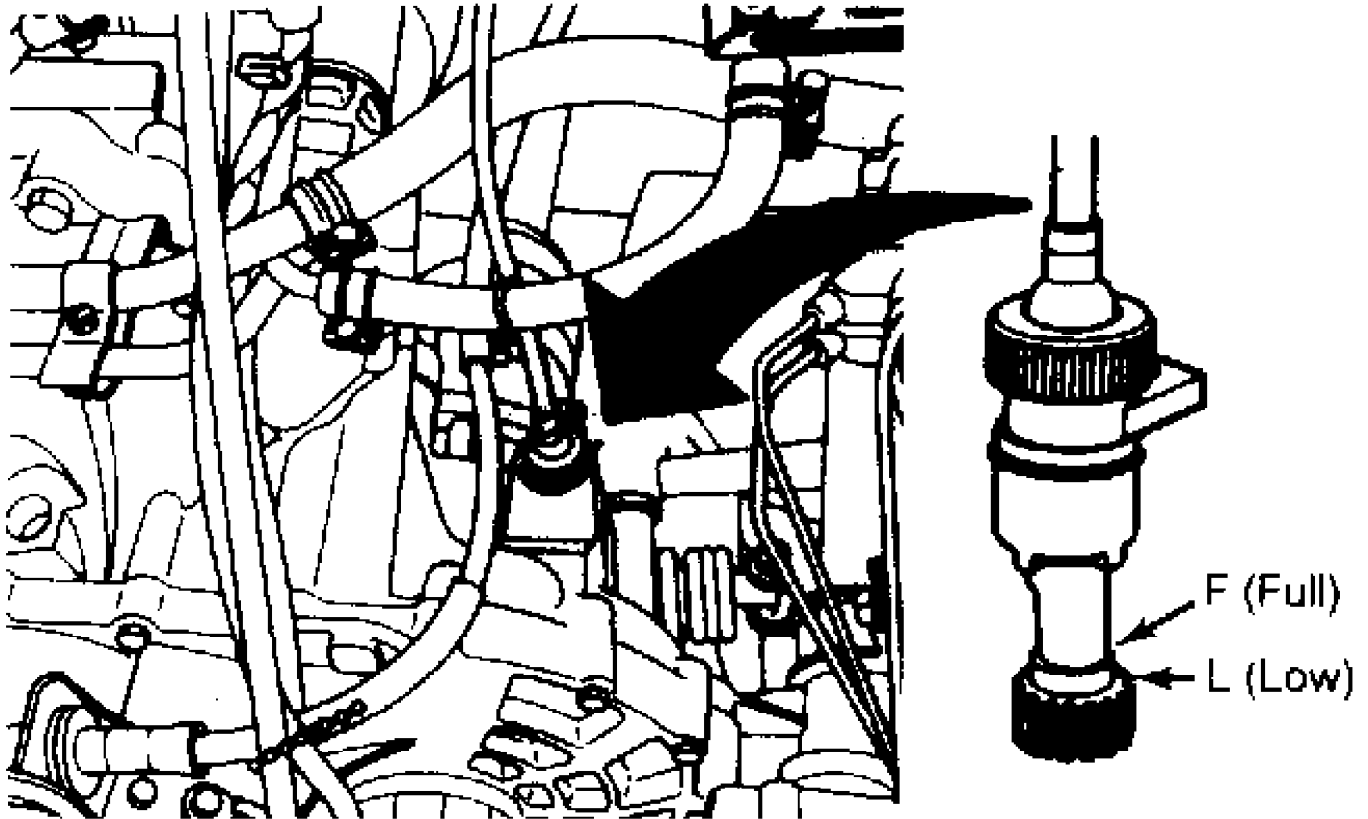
Checking Oil Level FWD (MX-6 & 626; Protege & 323 Similar)
